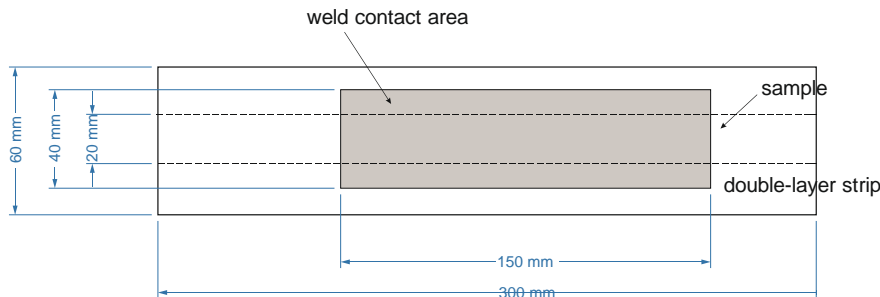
Sealed double-layer strip and position and dimension of the test specimen according to the German DIBt-Guideline for the acceptance test of coated fabrics and their joints [X99-2]
